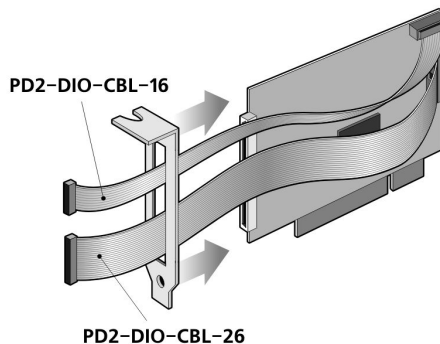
Passing cables for J3 or J4 through the mounting bracket on a PDL-DIO board.
